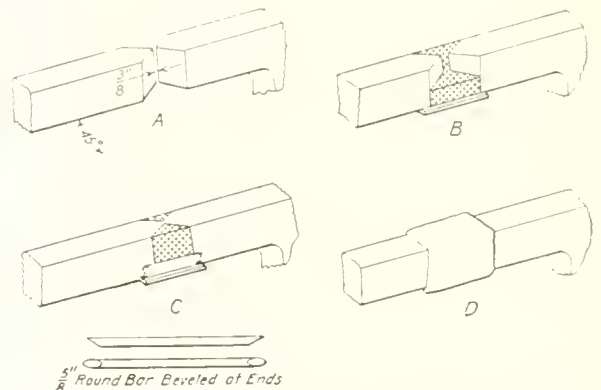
Drawing showing method of repairing engine frame. (Courtesy RAILWAY MECHANICAL ENGINEER)
